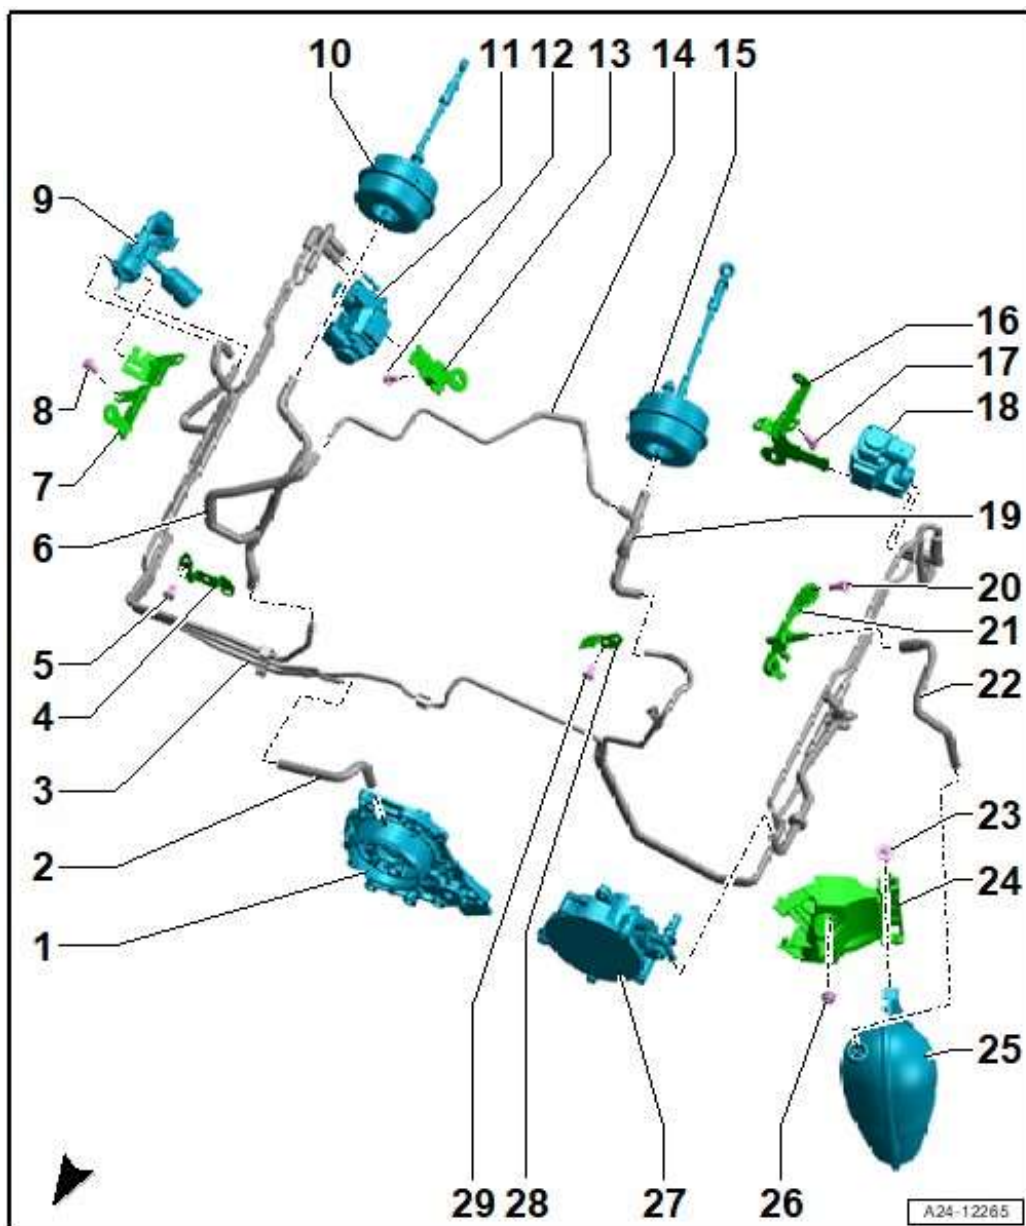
Assembly overview – vacuum system incl. N649, number 9.
